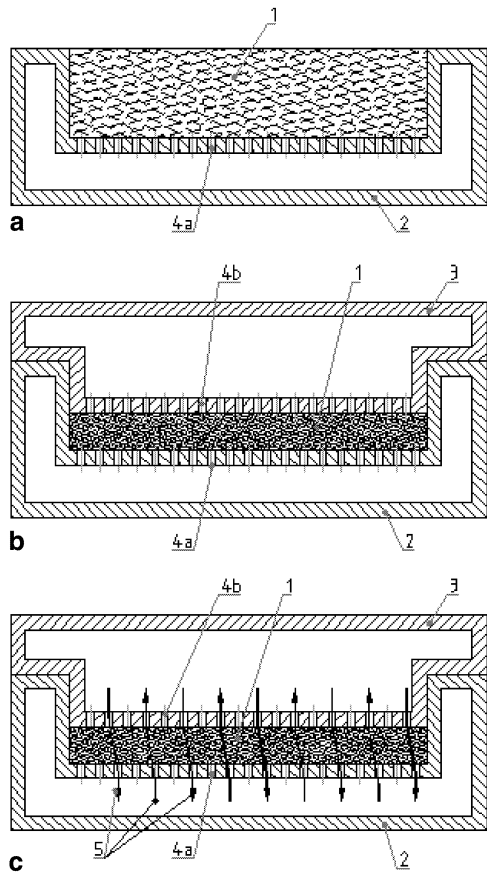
Engineering drawings of the industrial press-mould-plate-system (Teflon coated) for the production of boards of dimensions of 1250×625×10–60 mm. The figure shows (1) the wood/adhesive mixture inserted in (2) the mould, (3) the pressure plate, (4a) and (4b) the respective mould and pressure plate perforation and (5) the gas/steam injection or evacuation
